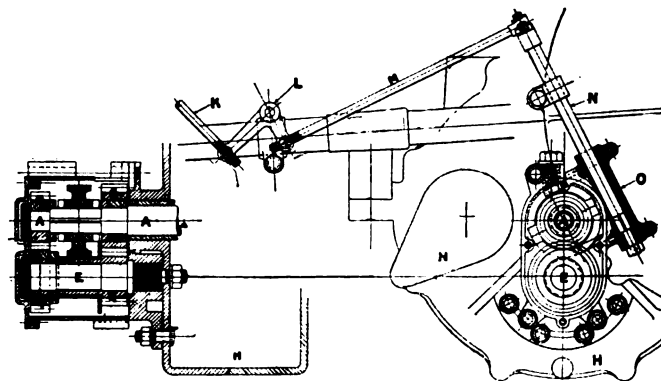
DETAILS OF ARIEL TWO-SPEED GEAR.
